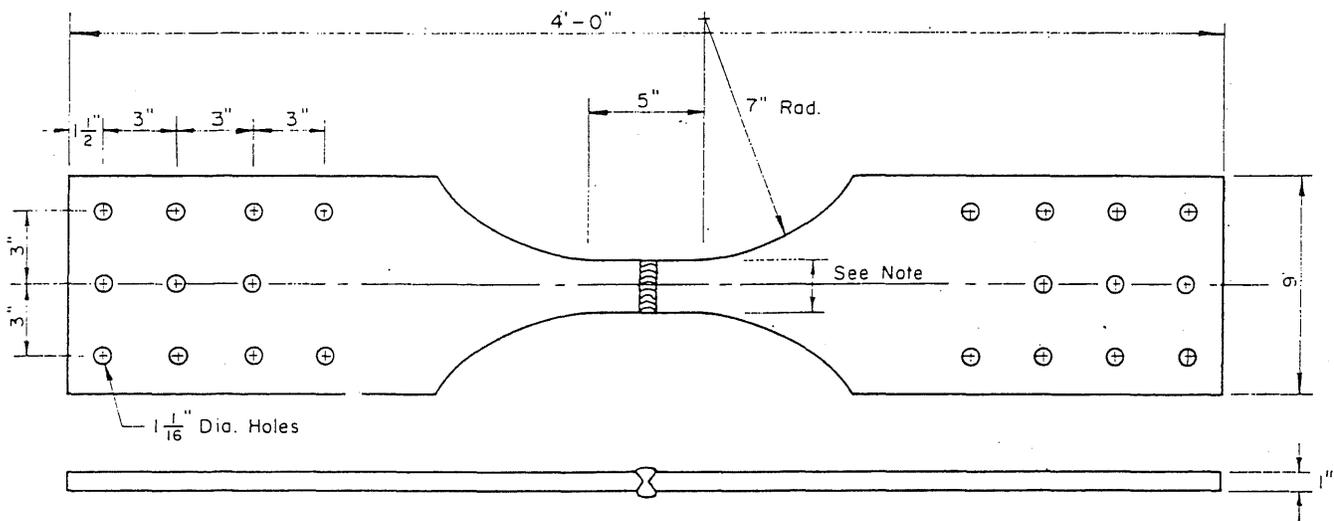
Details of the butt welded fatigue test specimens. The weld reinforcement was removed prior to testing
